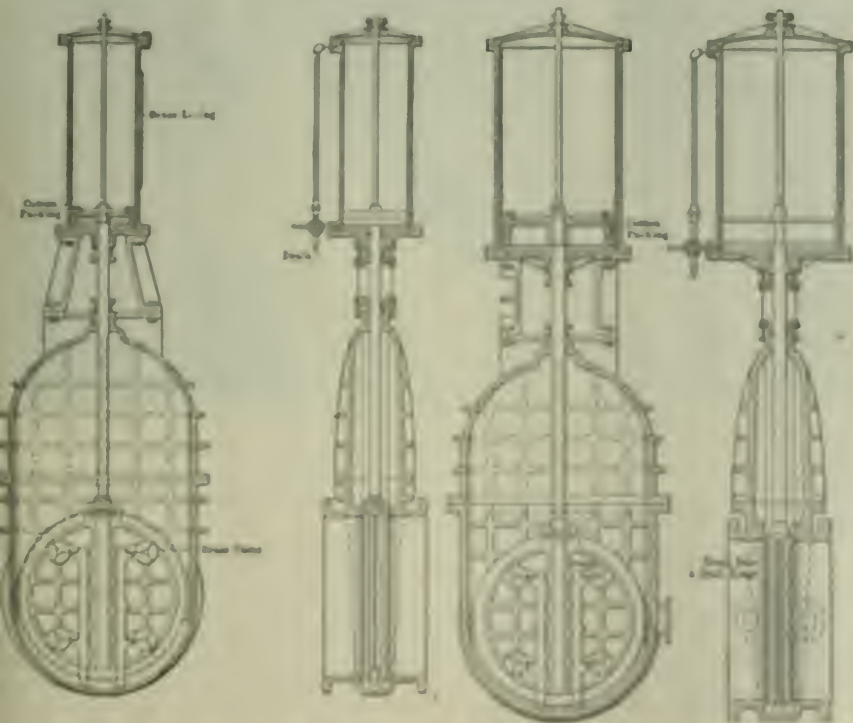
MECHANICAL PARTS OF HYDRAULIC VALVES
